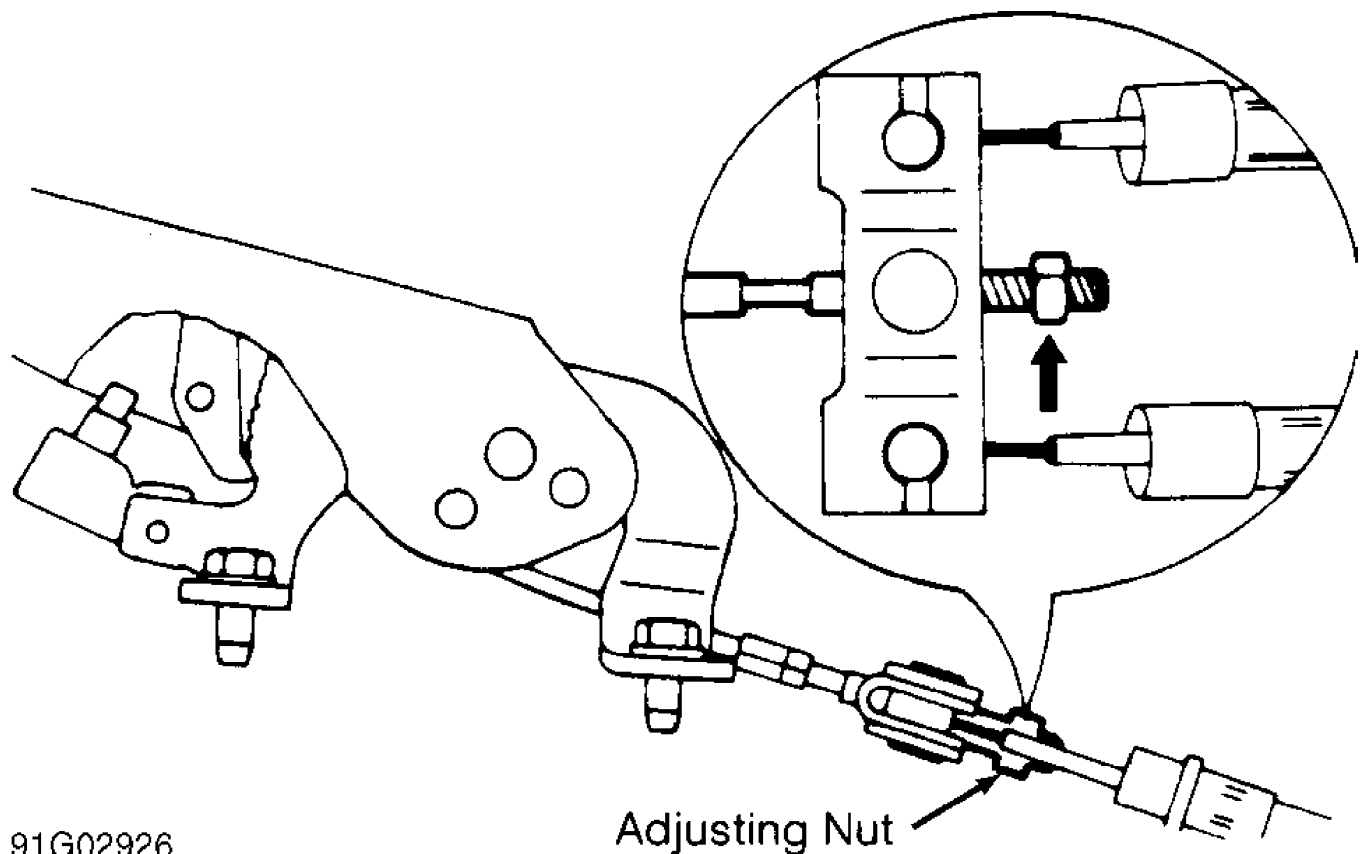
Adjusting Parking/Emergency Brake (Typical)
